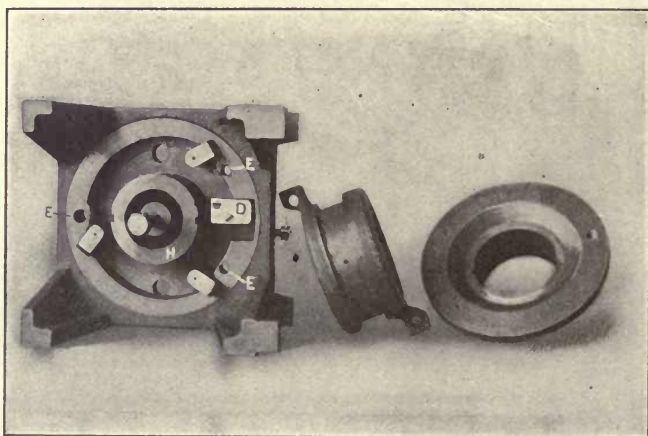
Drill Jig shown in Fig. 78, with One of the Pieces in Place
